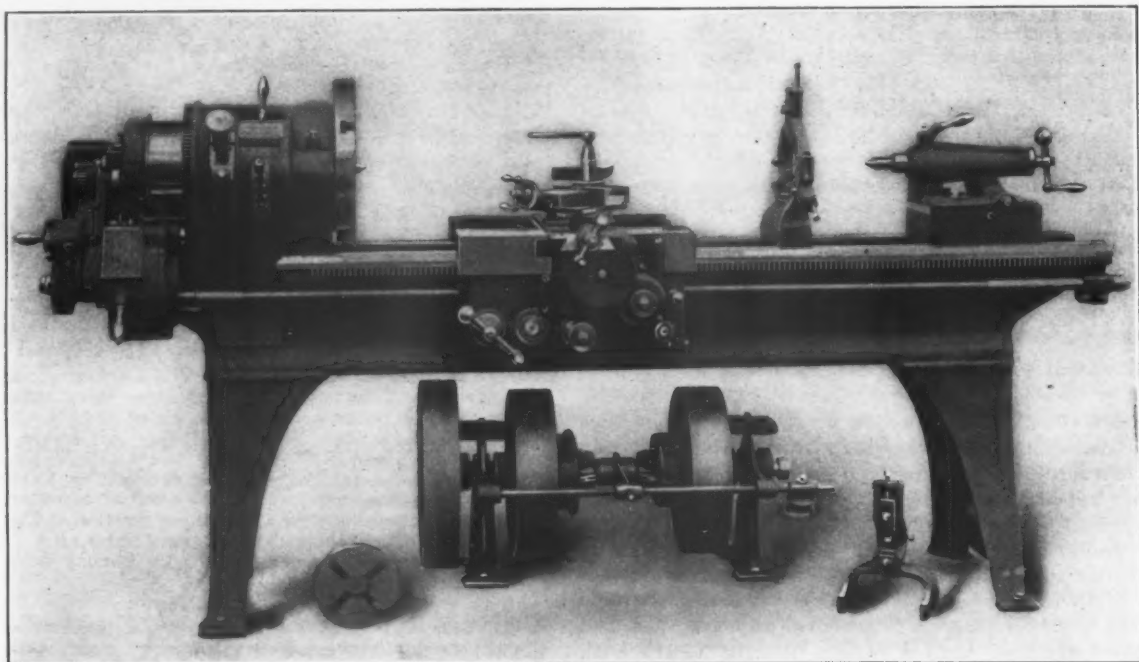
The New Geared-Head Lathe Designed by W. L. Shellenbach and Built by the John B. Morris Foundry Company, Cincinnati, Ohio.
